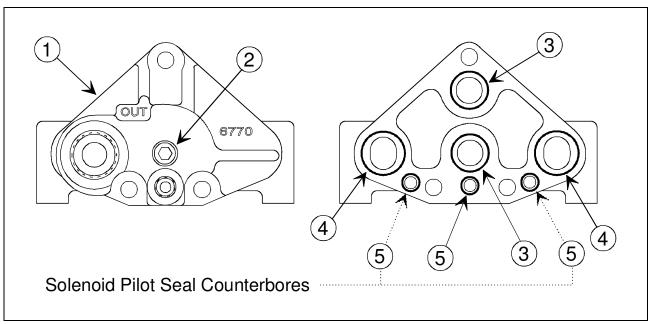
No. 6770 V20LS Outlet Cover Assembly
